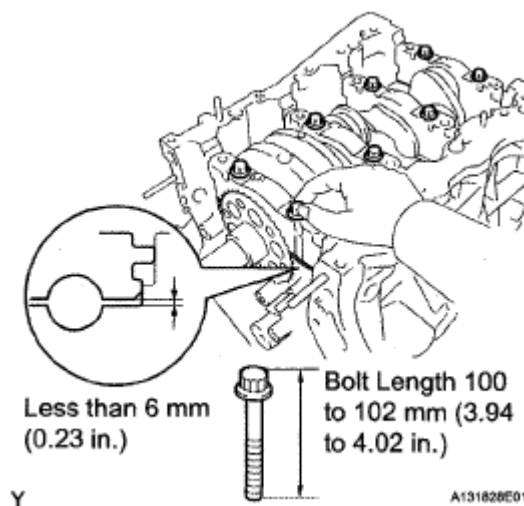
Checking Clearance Between Main Bearing Cap And Cylinder Block
